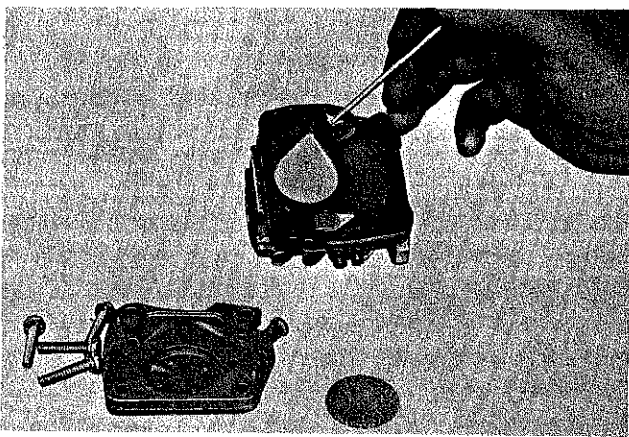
When checking the fuel pump diaphragm on McCulloch carburetors, make sure the flapper valves are on the fuel side of the gasket.
